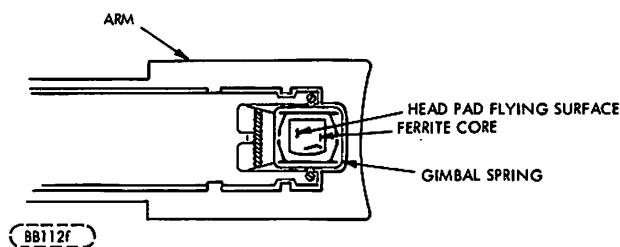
TYPICAL HEAD/ARM COMPONENTS
